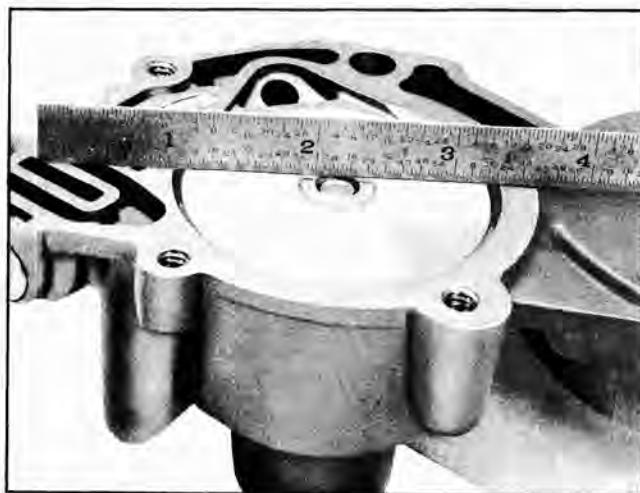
Accumulator Piston Assembly Installed in Accumulator Body
